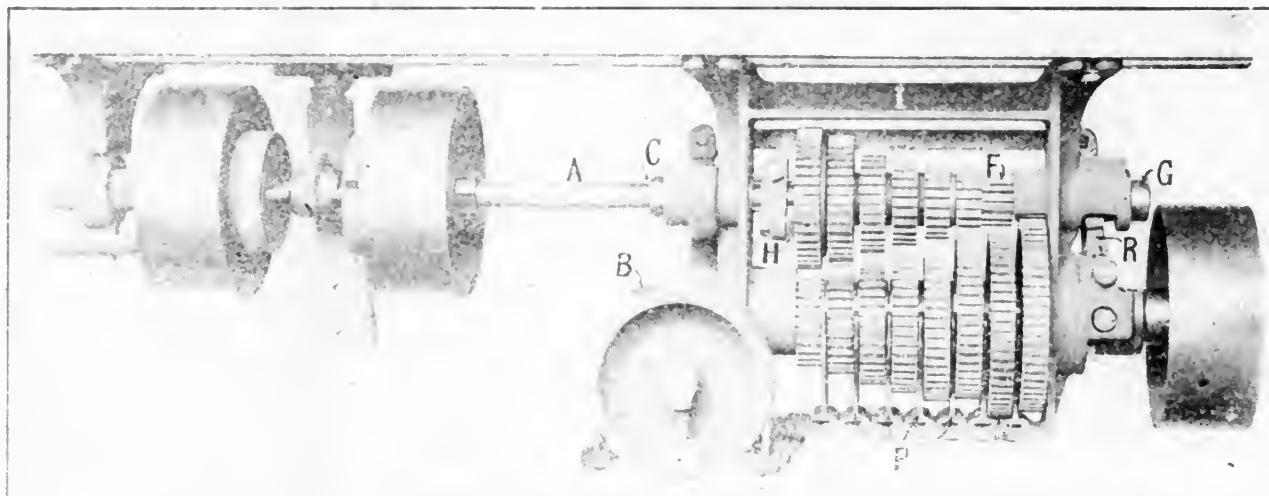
REAR VIEW WITH COVERS REMOVED, SHOWING ROPE SHEAVE FOR SHIFTING SLIDING CONE.
